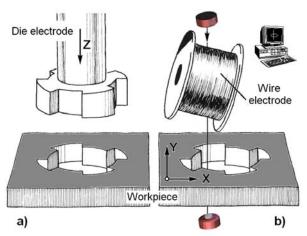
Different types of EDM a) Die-sinking EDM, b) Wire-cut EDM
